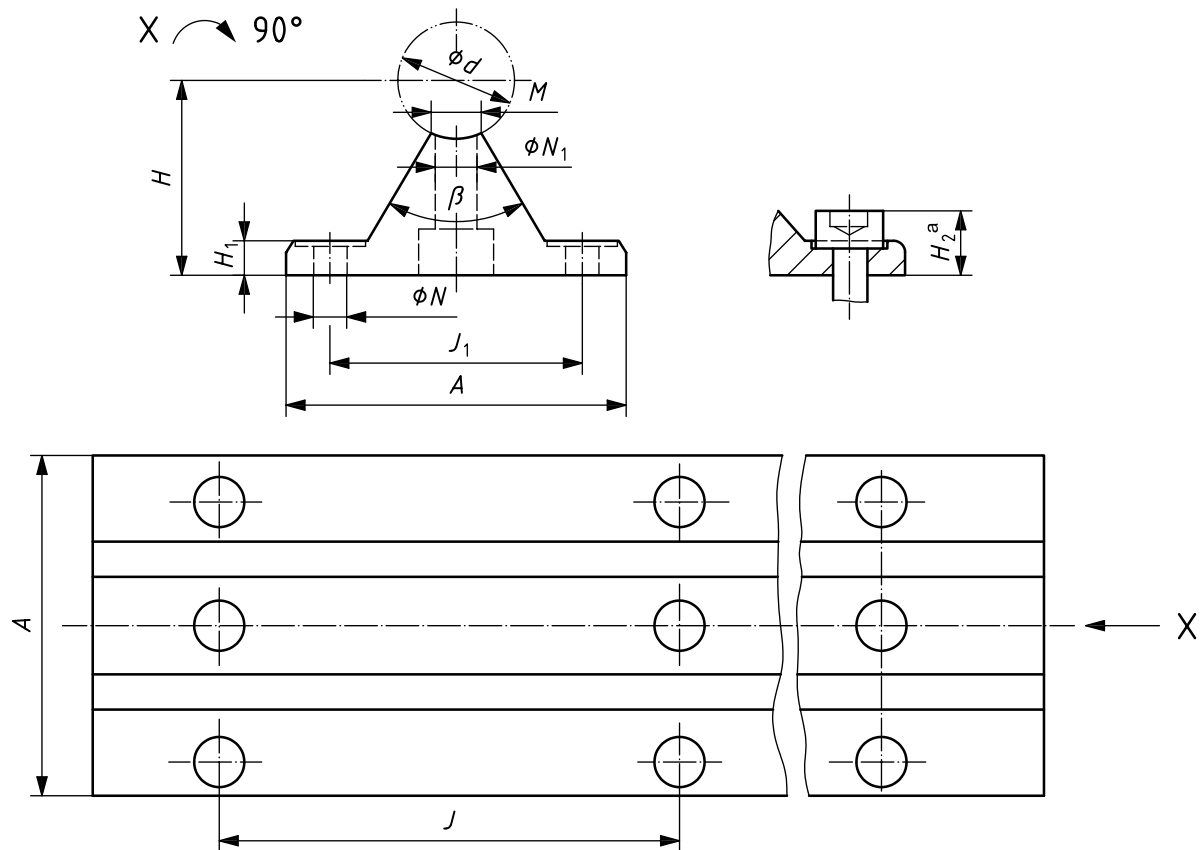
Standard height shaft support rails for series 3 sleeve type linear ball bearings
